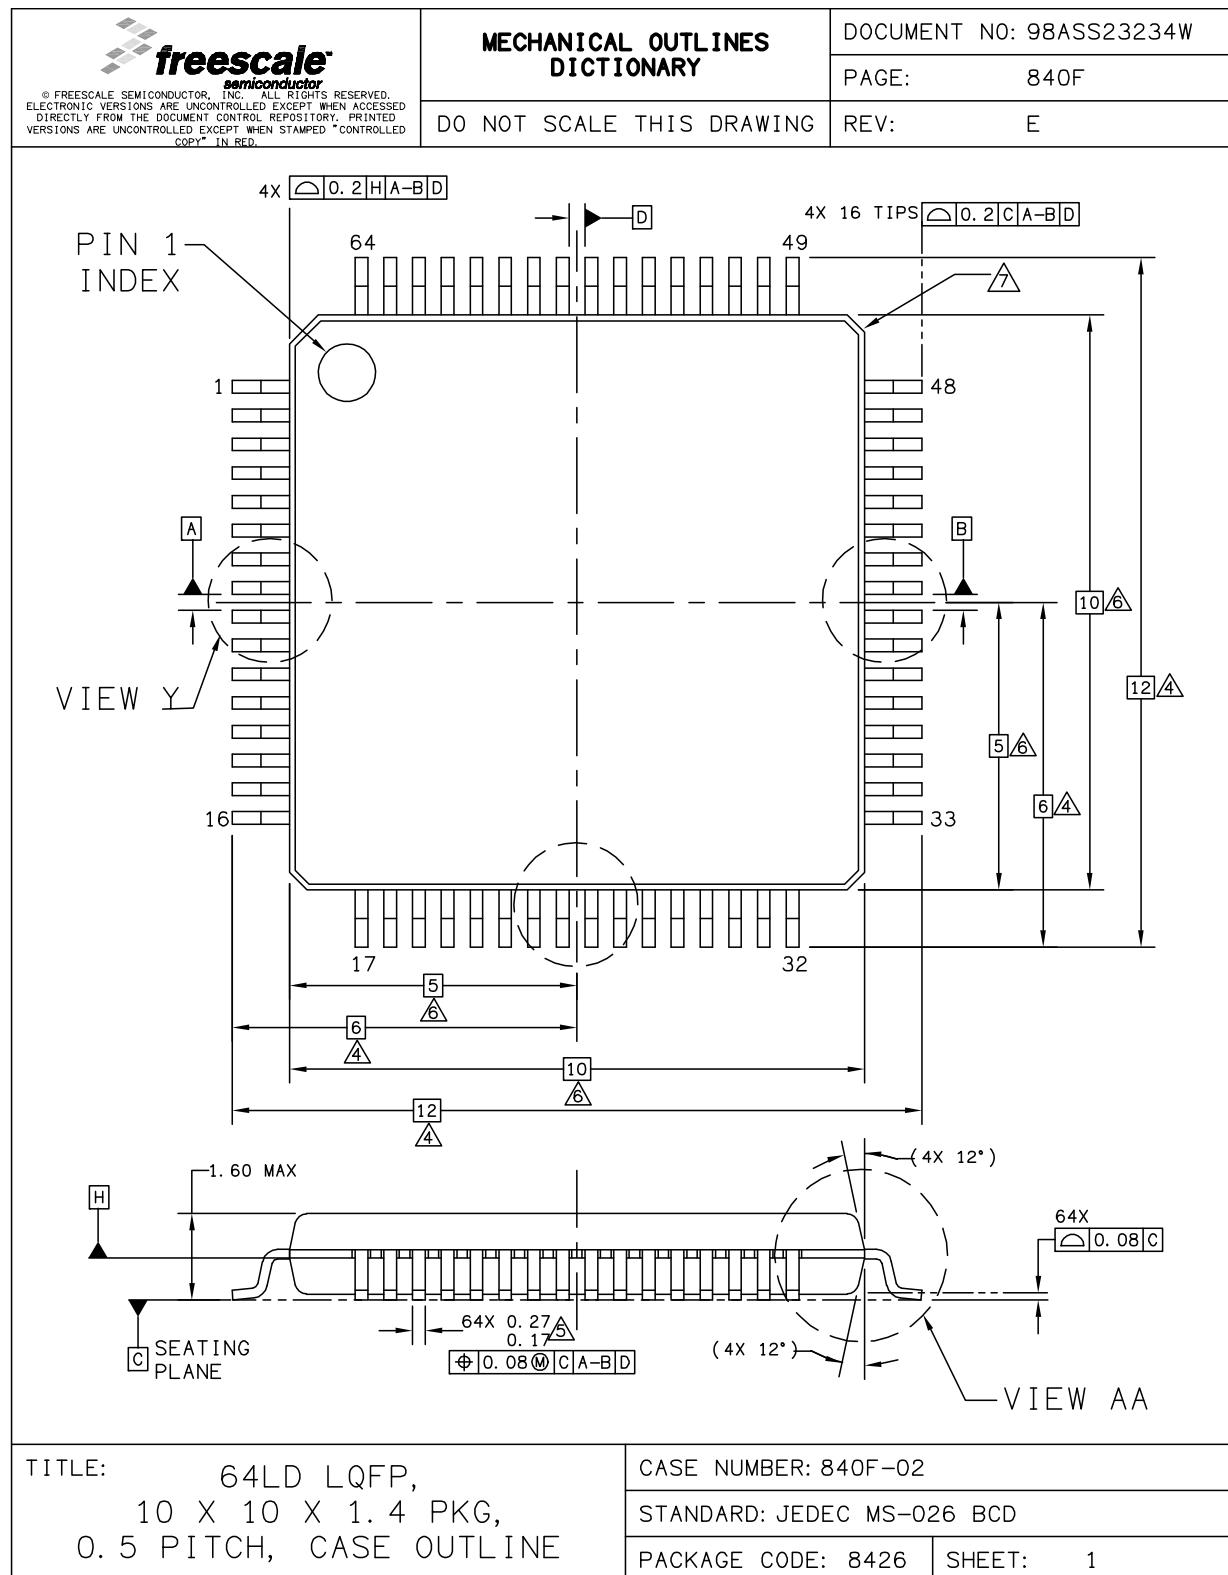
64 LQFP package mechanical drawing (1 of 3)
